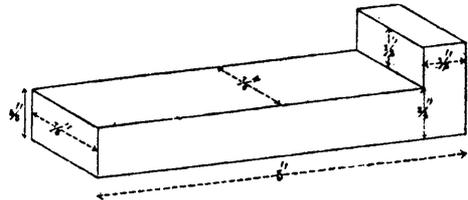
PERSPECTIVE SKETCH OF KEY FOR A WHEEL.
